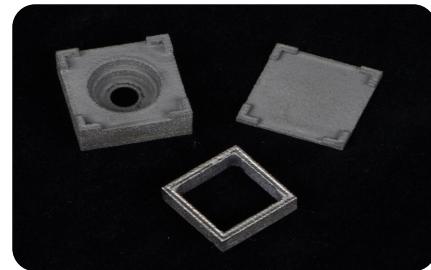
3-D printed Titanium holder base, processing hold and cap
